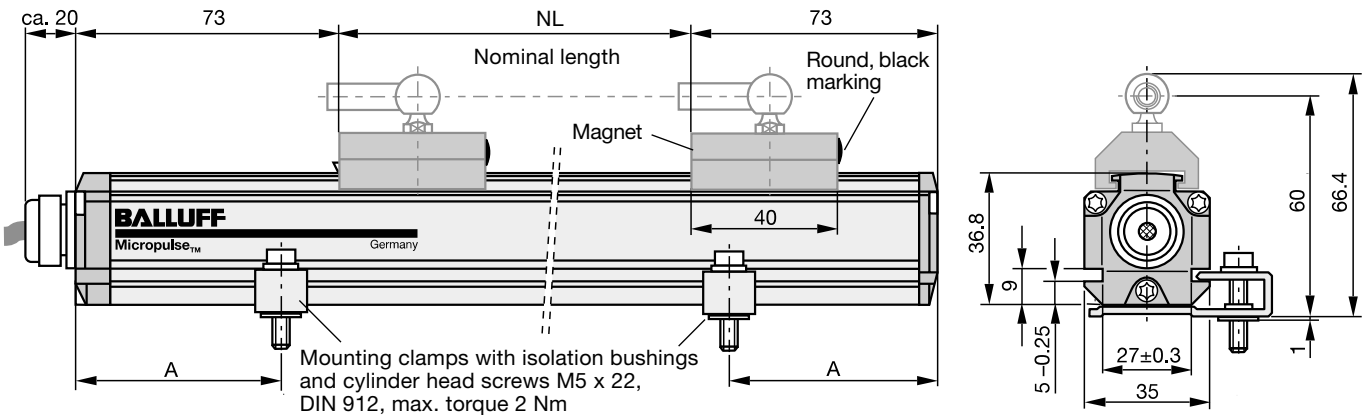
Dimensional drawing with profile dimensions (transducer BTL5...P-KA.. with magnet BTL5-F-2814-1S)
